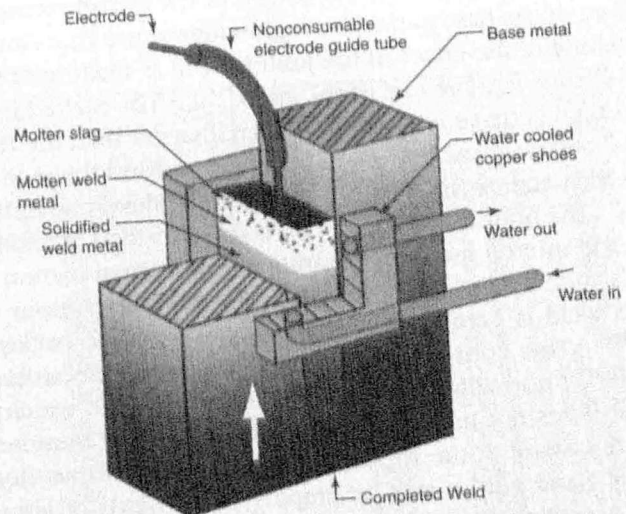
The ESW nonconsumable guide system. Courtesy of Welding Inspection Technology, American Welding Society.
